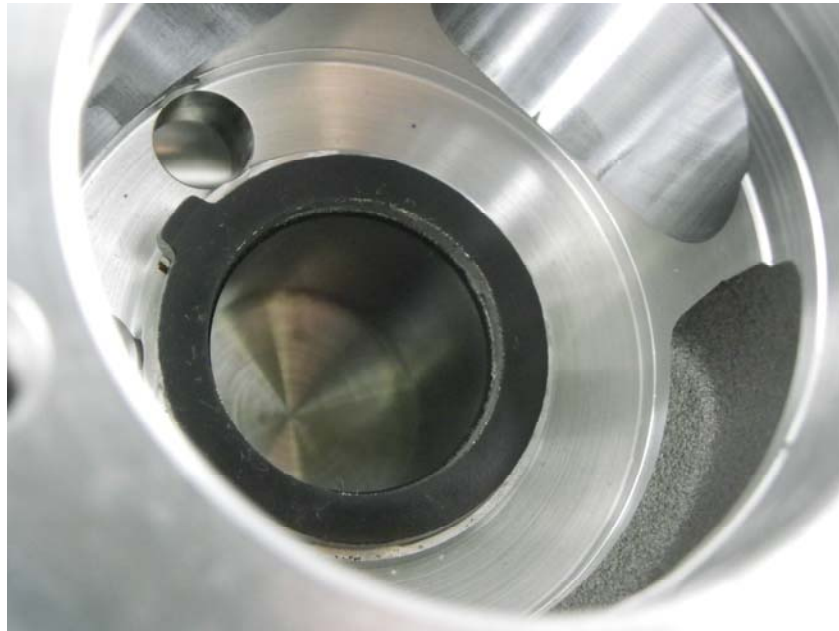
AF7469 ULSD, Rear Pump Body Camshaft Bushing
